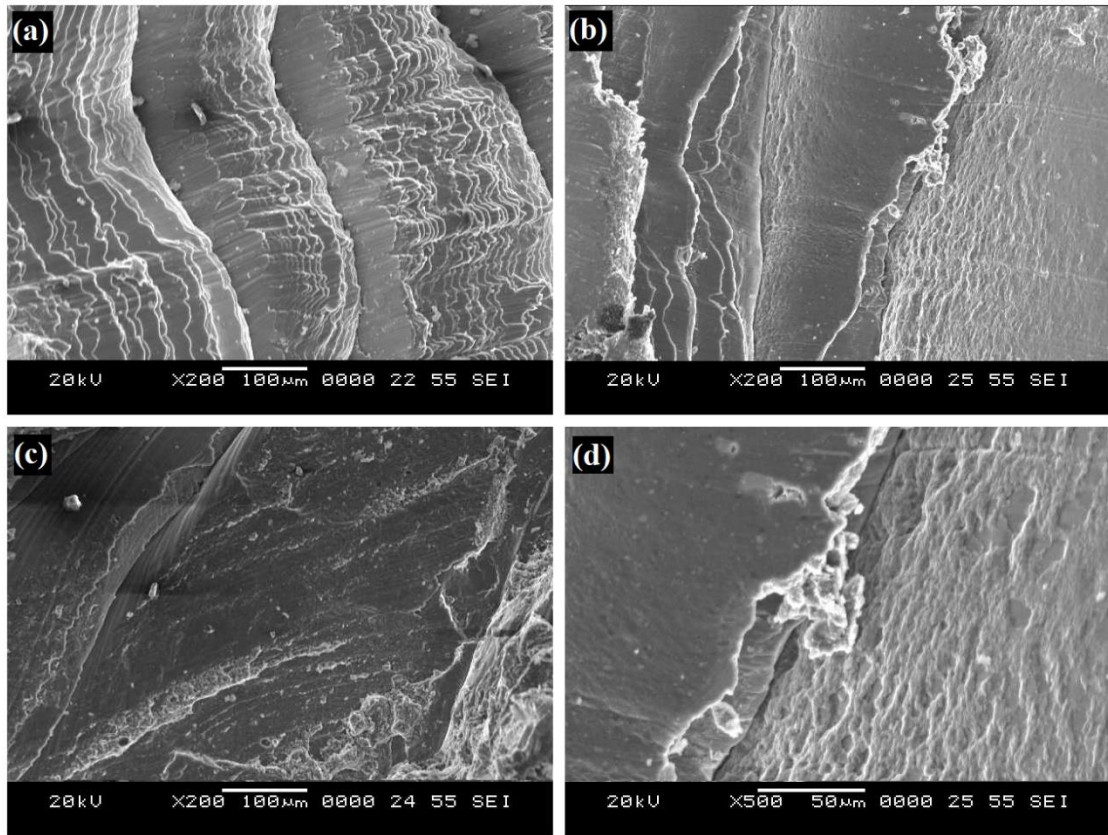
SEM images of tensile fracture surface (tested in the direction of weld) of Al-5Mg-8Ce-3.5Si aluminium alloy joints friction stir welded with CPP tool, at (a) Speed of tool rotation of 1000 RPM and welding speed of 10 mm/min, (b) Speed of tool rotation of 1000 RPM and welding speed of 15 mm/min, (c) Speed of tool rotation of 1000 RPM and welding speed of 20 mm/min, (d) Higher magnification image showing the dimples, pullout, decohesion and cracked AlSiMg particles.
